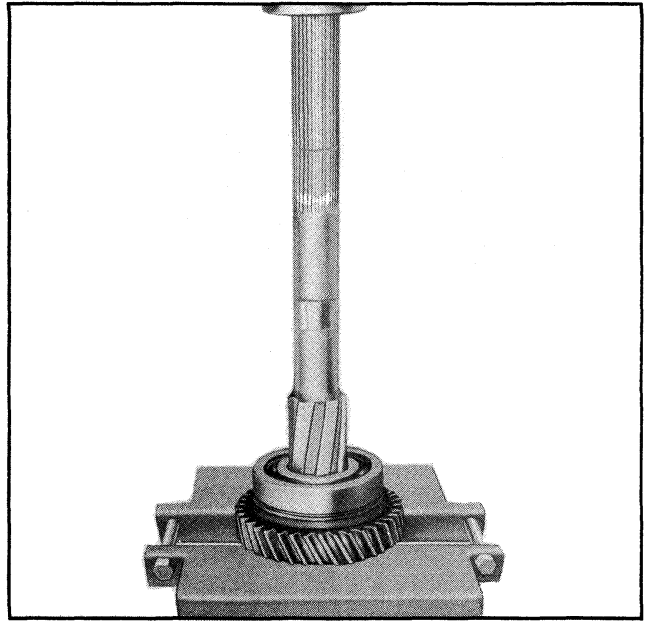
A-22 Removing Mainshaft From Rear Bearing and First Speed Gear
